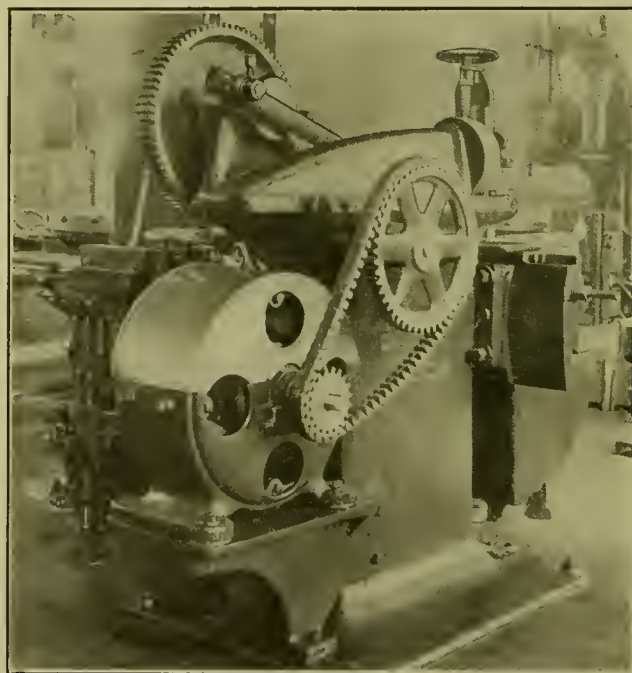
A COMPACT ARRANGEMENT OF VARIABLE-SPEED MOTOR DRIVING UPON A 12-IN. HEWES & PHILLIPS CRANK SHAPER.—5 H.P. CROCKER-WHEELER MOTOR.
